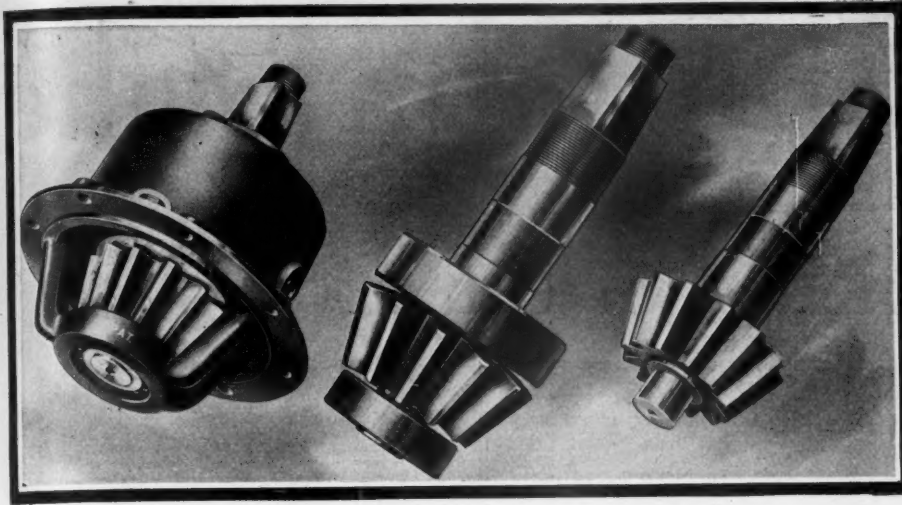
PREMIER DRIVING PINION AND ASSEMBLY
